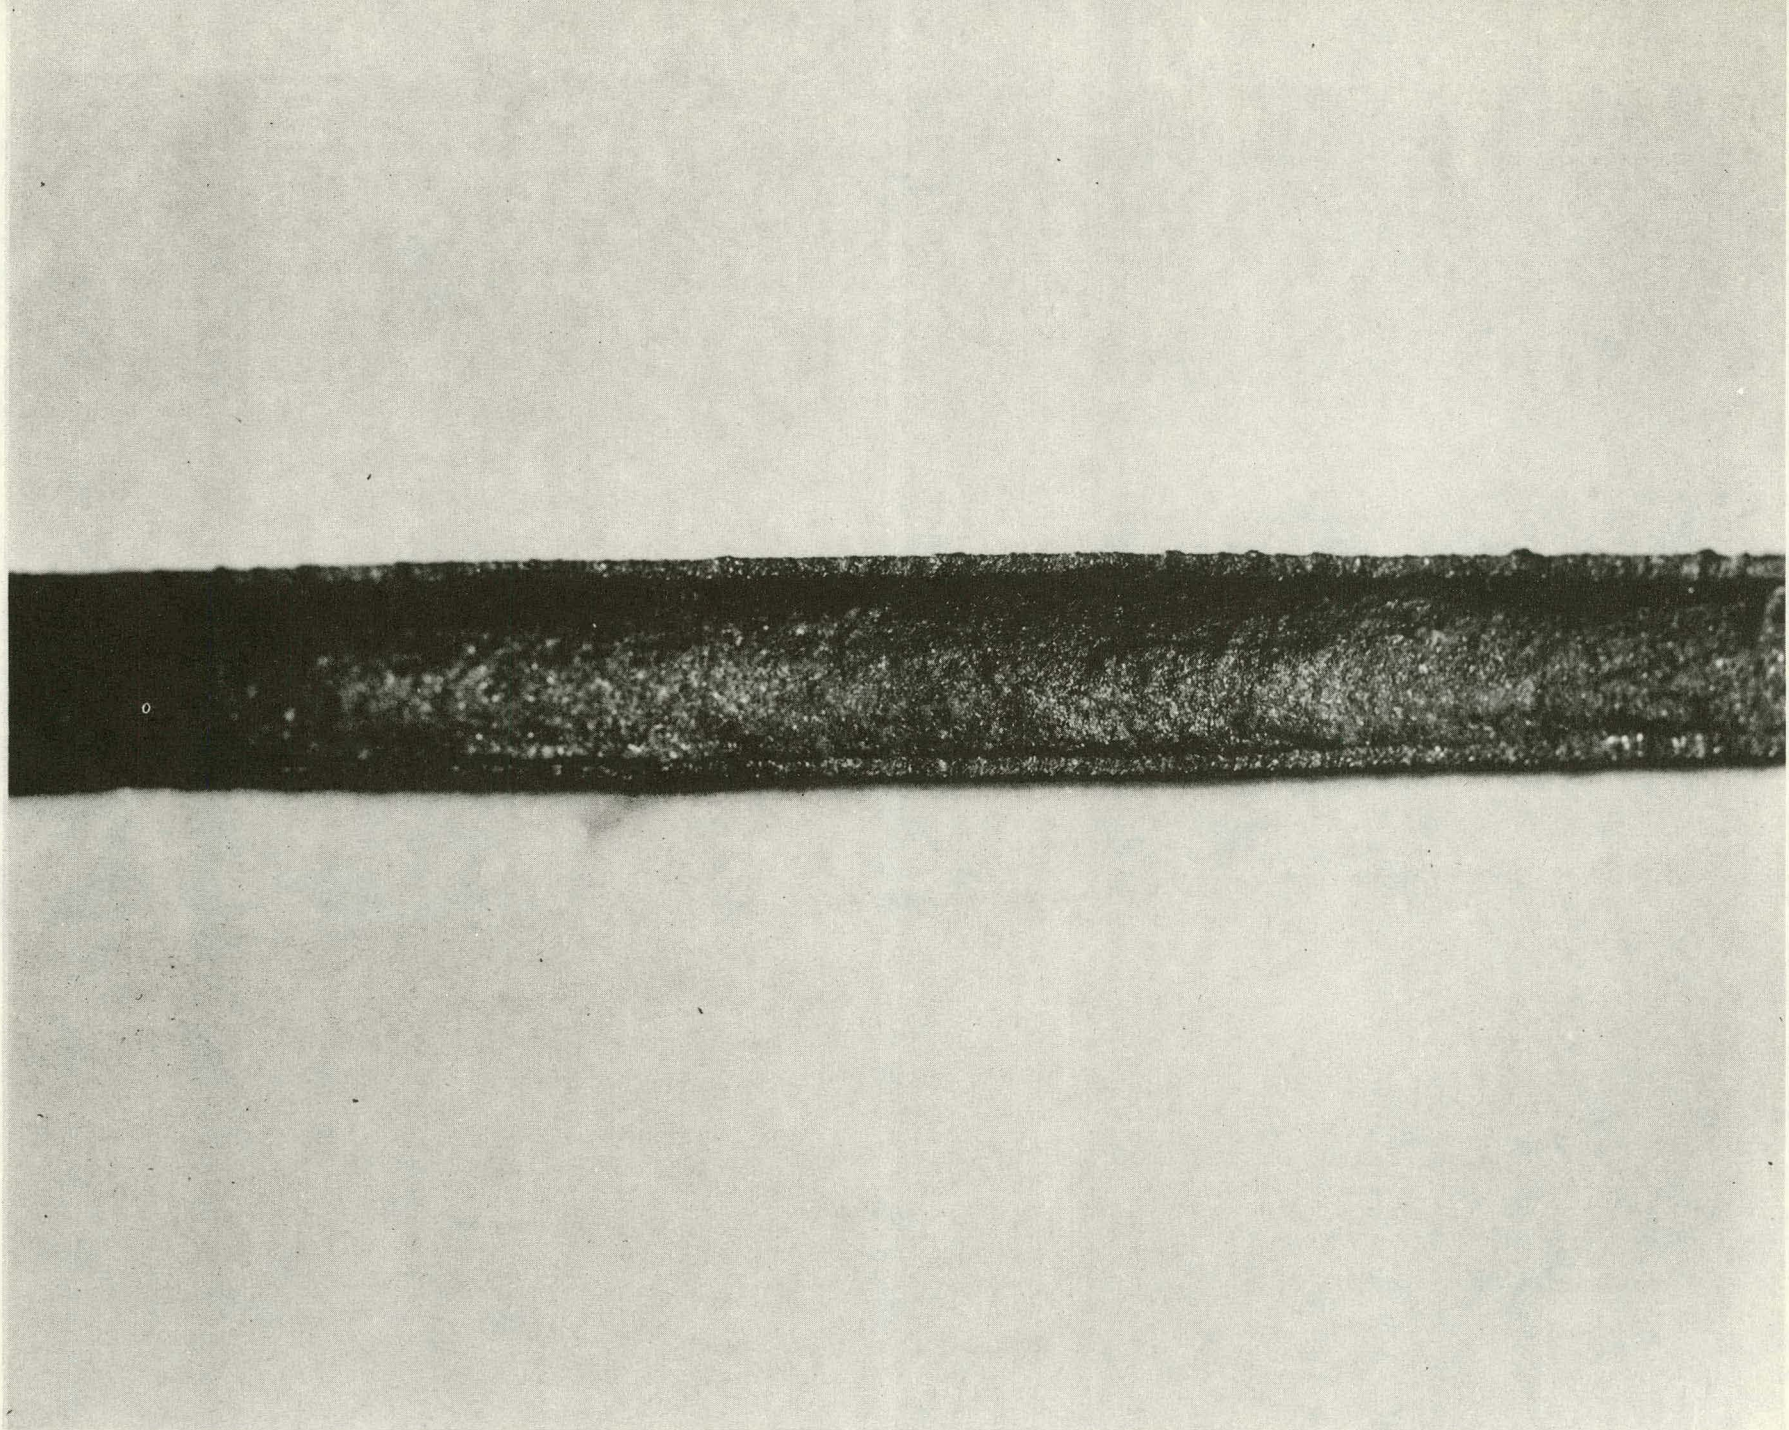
Corroded cooler tube showing erosion effect (left side, 7A, first stage)
